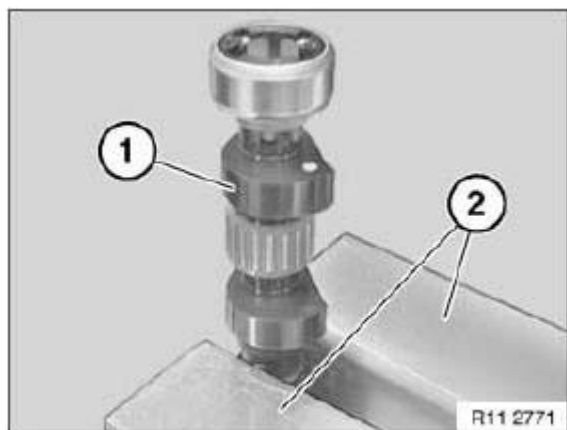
Clamping Eccentric Shaft Installation With Protective Jaws In Vice
